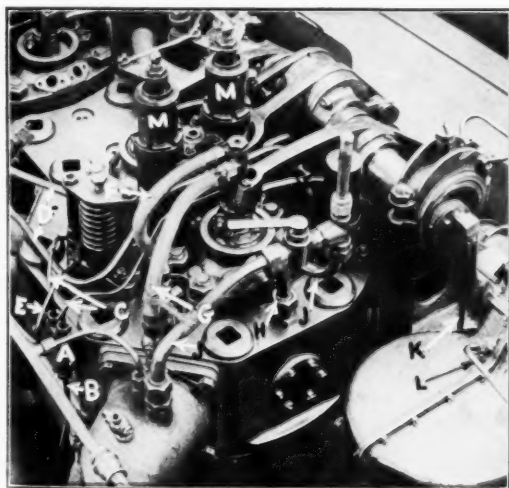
View looking down on the rear cylinder head showing the arrangement of parts and the rubber hose connections which supply water circulation to the exhaust valve.
